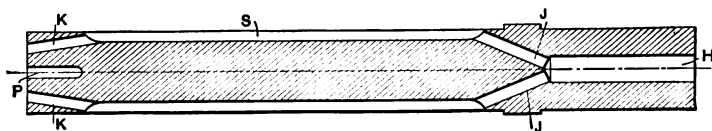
Section of Deep-Hole Drill shown in Fig. 268
